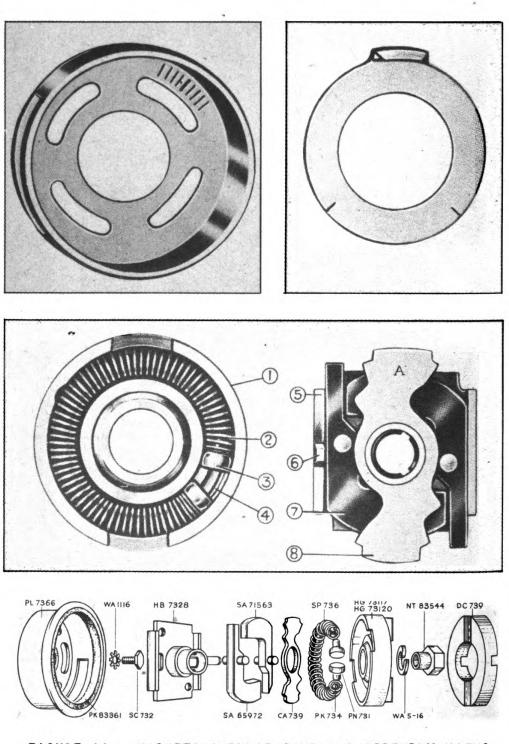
FIGURE II - MAGNETO IMPULSE COUPLING ASSEMBLY VIEWS
